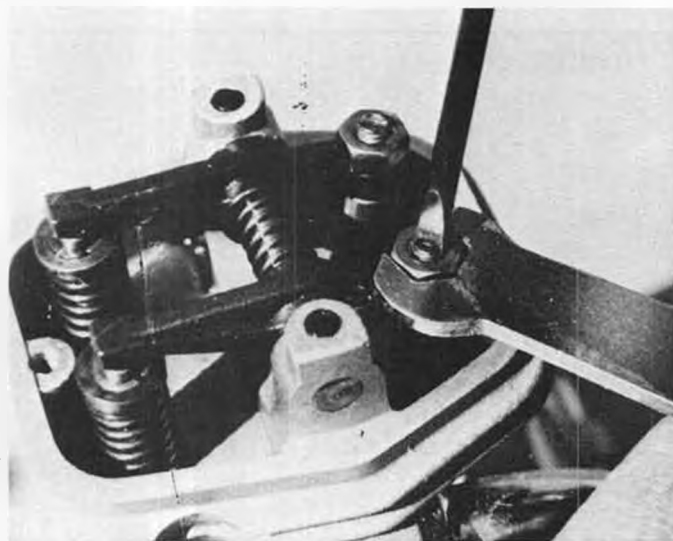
Beware of losing the valve stem keepers; they are held in place by spring pressure and can be dislodged if improperly handled. See text.
